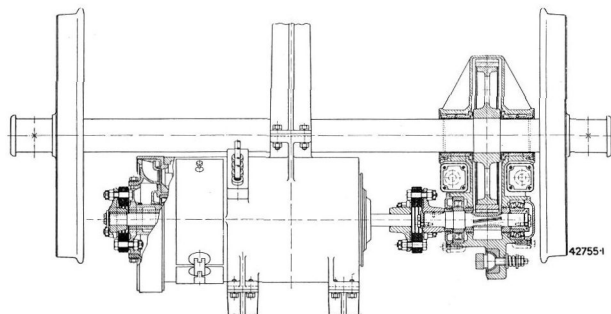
Drive by long cardan shaft, for tramway coaches. Driving motor rigidly mounted in frame.
